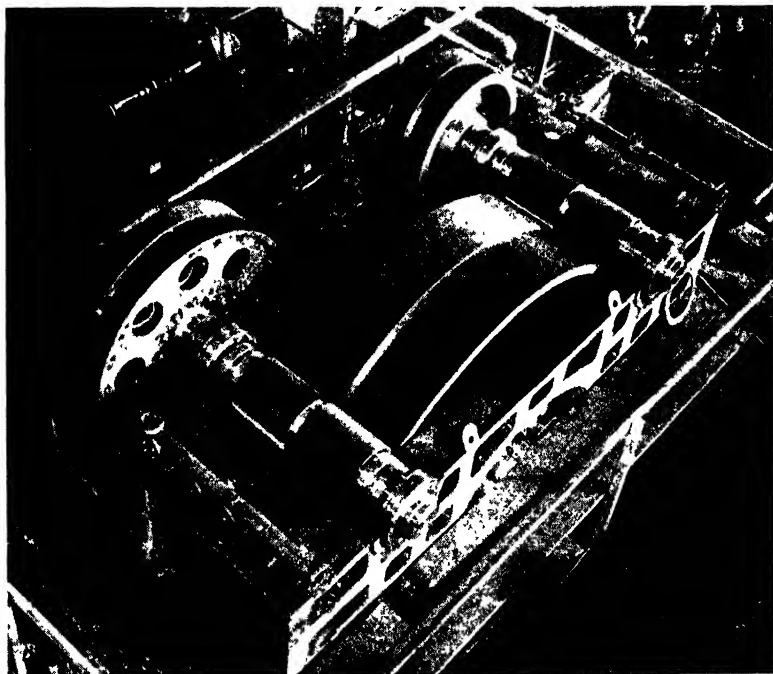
Reduction gears with high-speed pinions removed (see Fig. 76).
